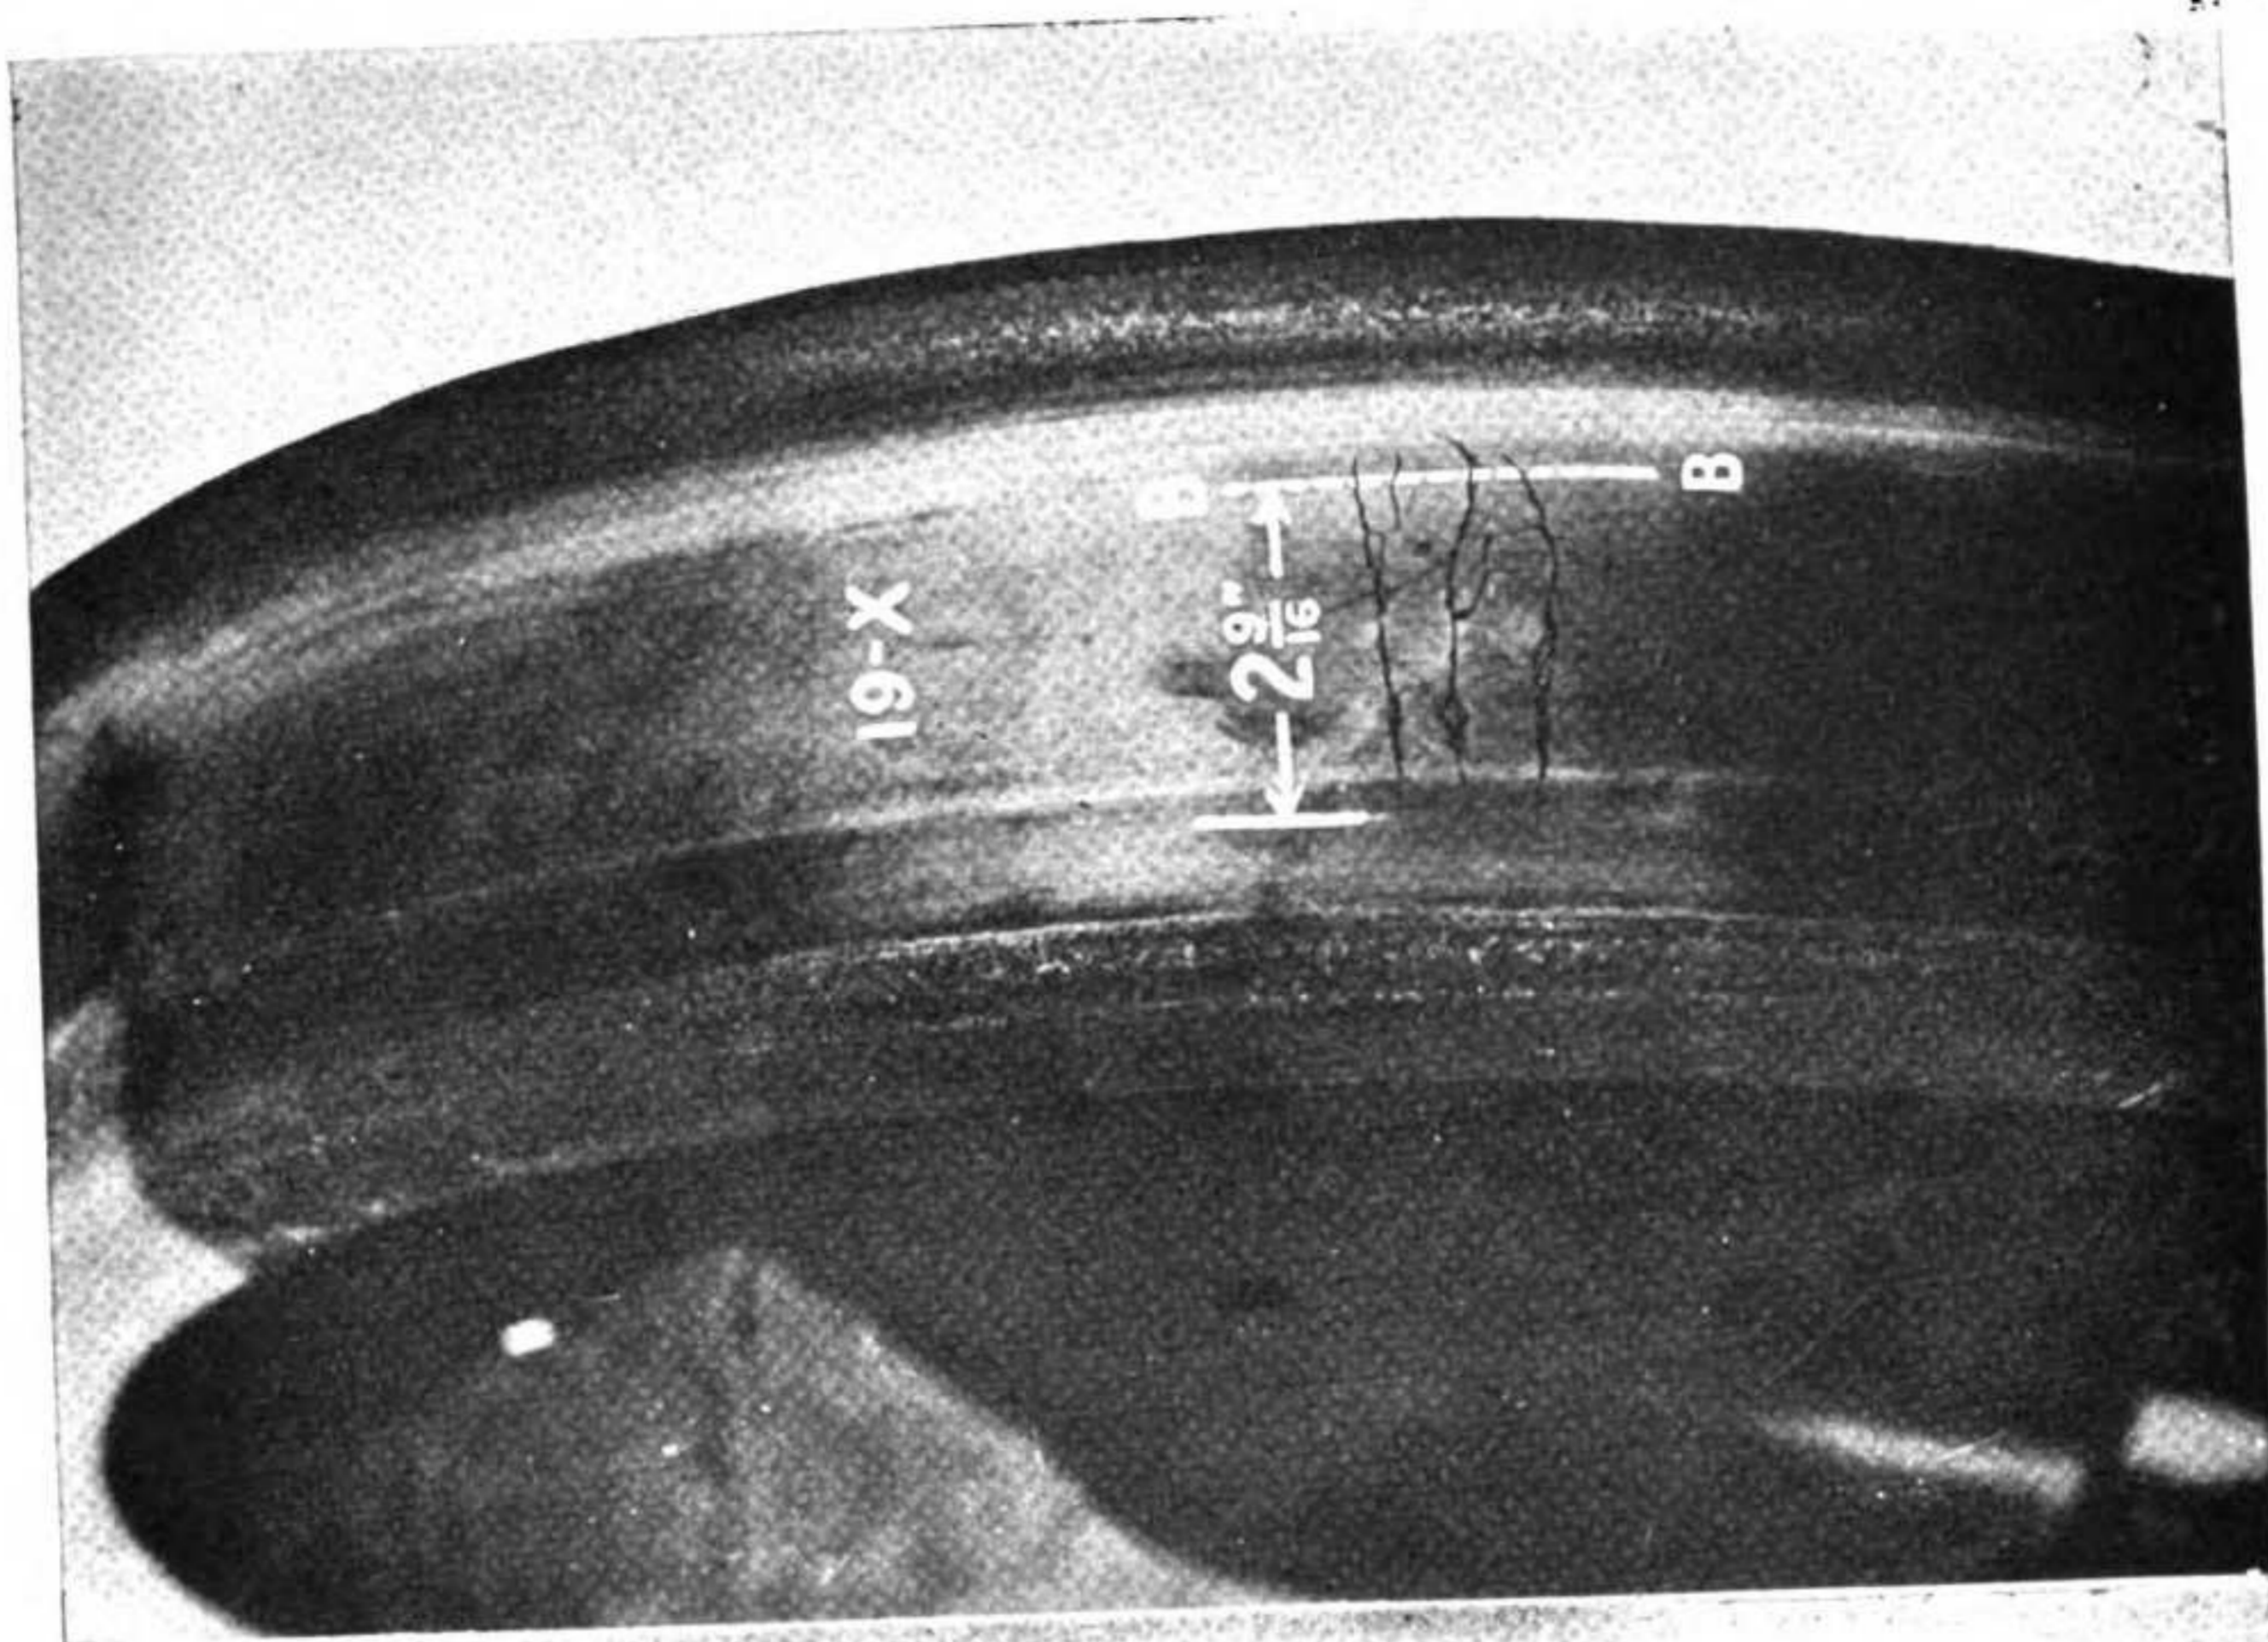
Brake burn cracks, cast-iron wheels. Condemnable cracks over $2\frac{3}{4}$ inches in length.
